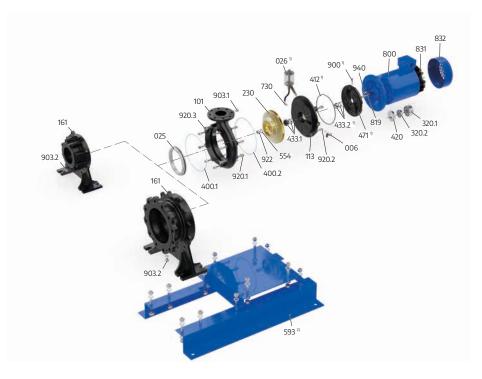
Spare parts for the herborner.F-N/herborner.F-N-PM pump (example: herborner.F-N)
